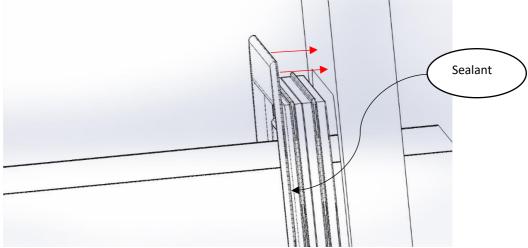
Assembling of the motor support (Bracket "A") on the frame.
